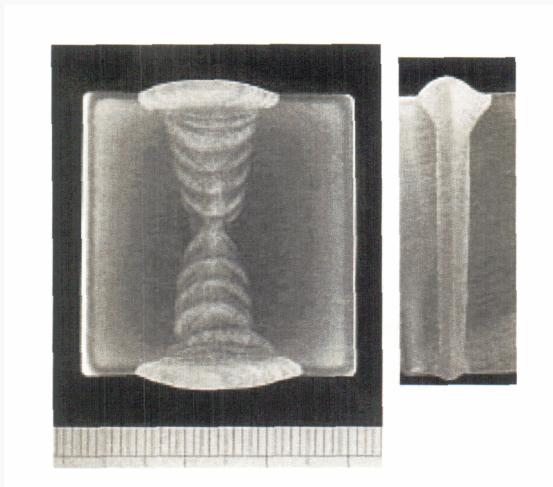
Multi-Pass GTAW (Left) and Single-Pass RPEB (Right) Welds in Ni-Cr-Mo-W Alloys
